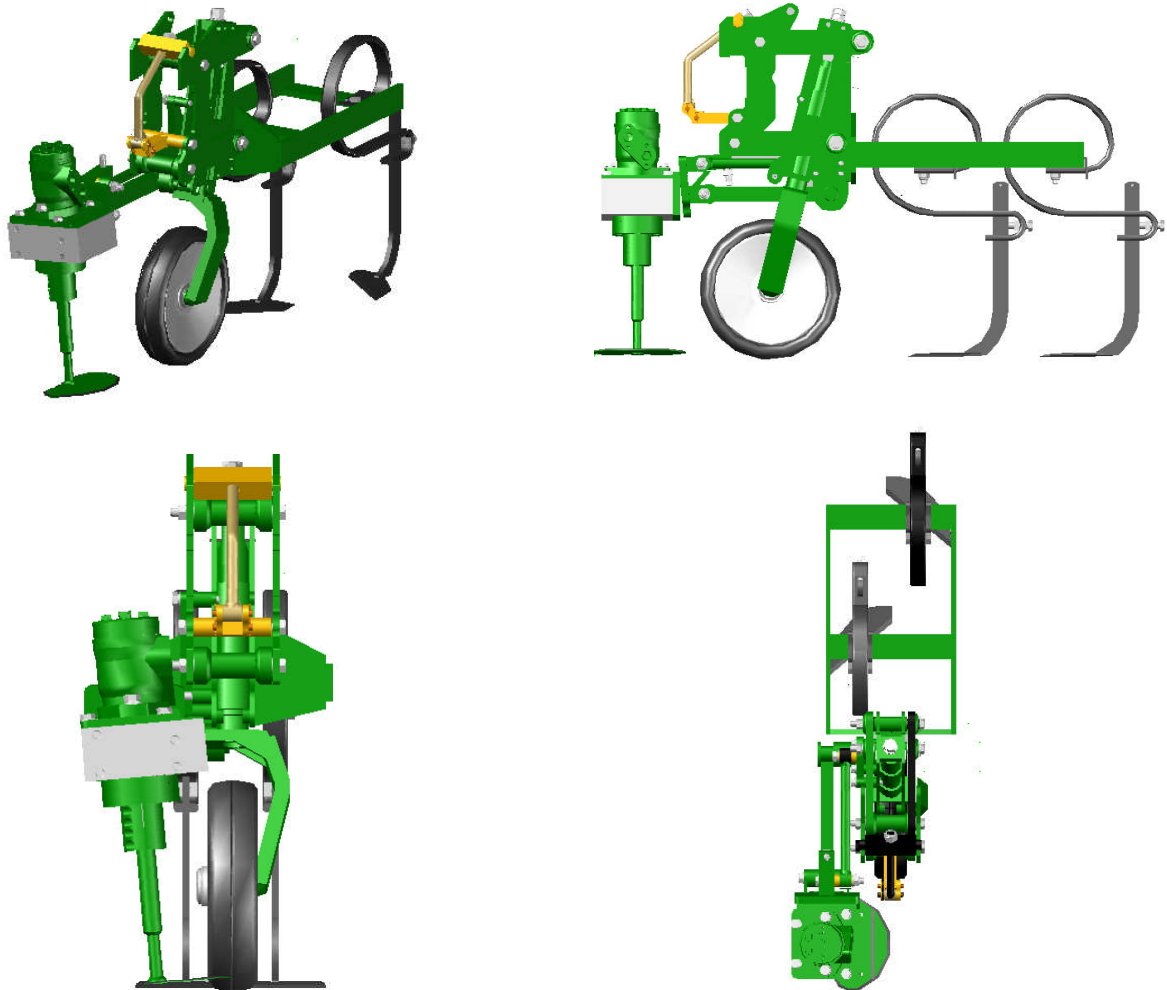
Different views of one unit showing the rotating disc, the motor, the depth wheel and the inter-row blades
